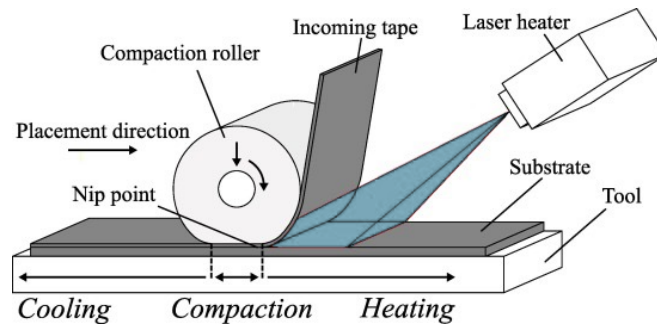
Three main LAFP tools: laser heater, compaction roller and tool
